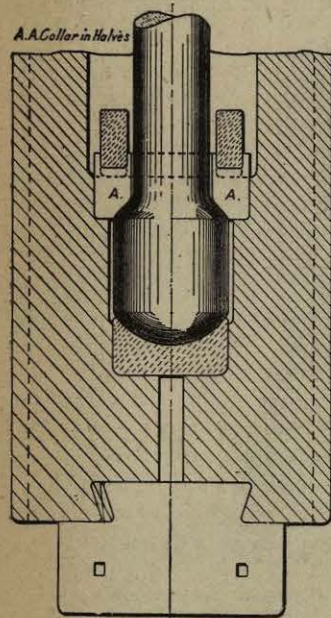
Ball and Socket Joints for attaching Tup to Hammer-rod.
